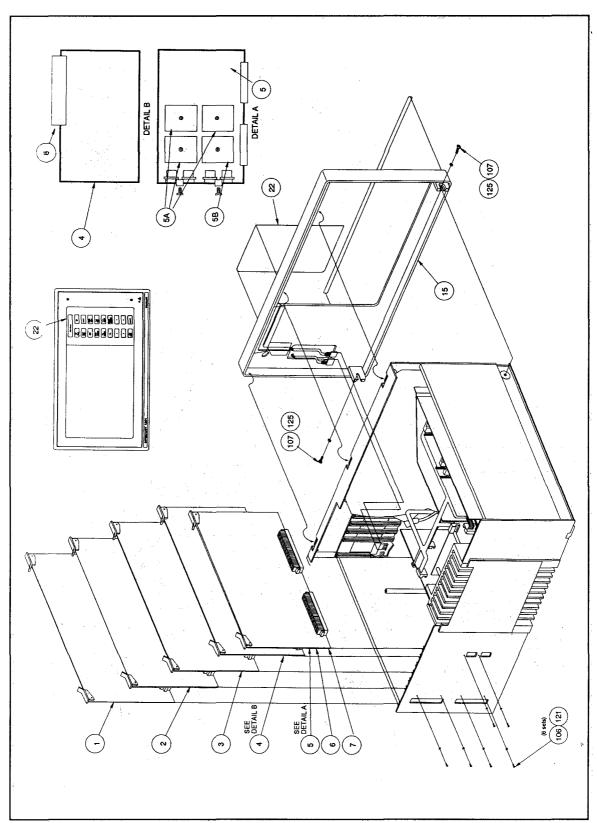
SIRECUST 1280/1281 Monitor Parts/Assembly (Sheet 2 of 5)
